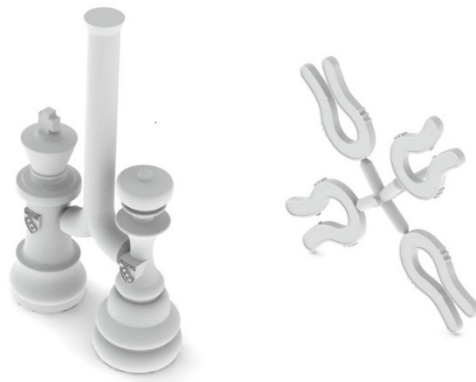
Components were designed with injection moulding in mind with features such as draft and runner diameter increased to compensate for layer lines within the mould cavity.
